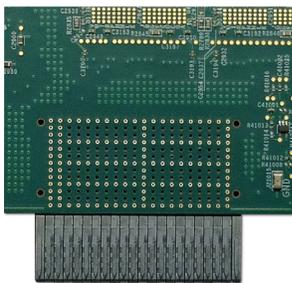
Missing copper in an assembly due to backdrilling — unable to be accessed by traditional pogo fixture.
